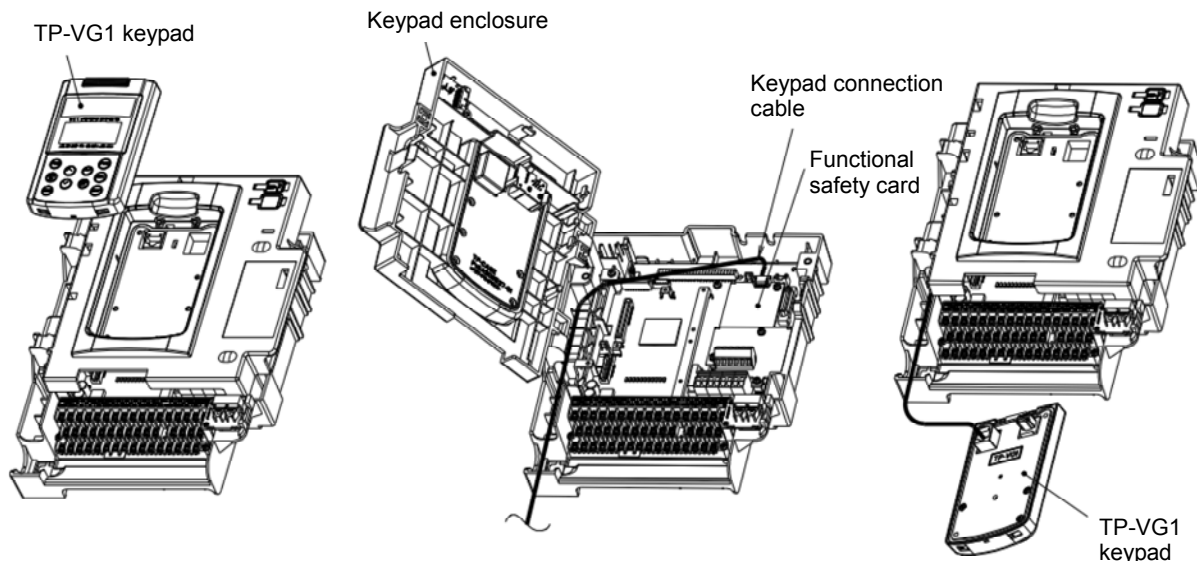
Connecting the Keypad (for Inverters of 30 kW or above)
